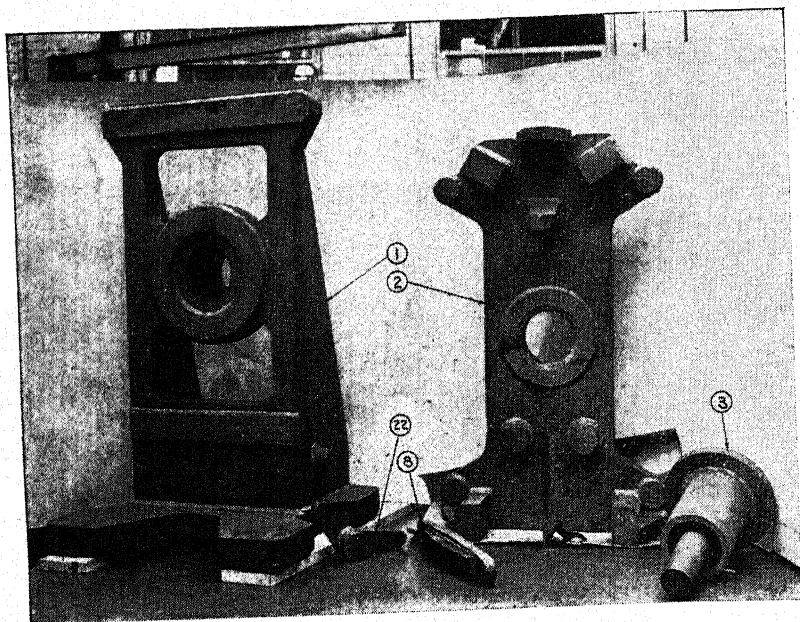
Arc welded parts of jig after strain relief heat treatment and sandblasting.
